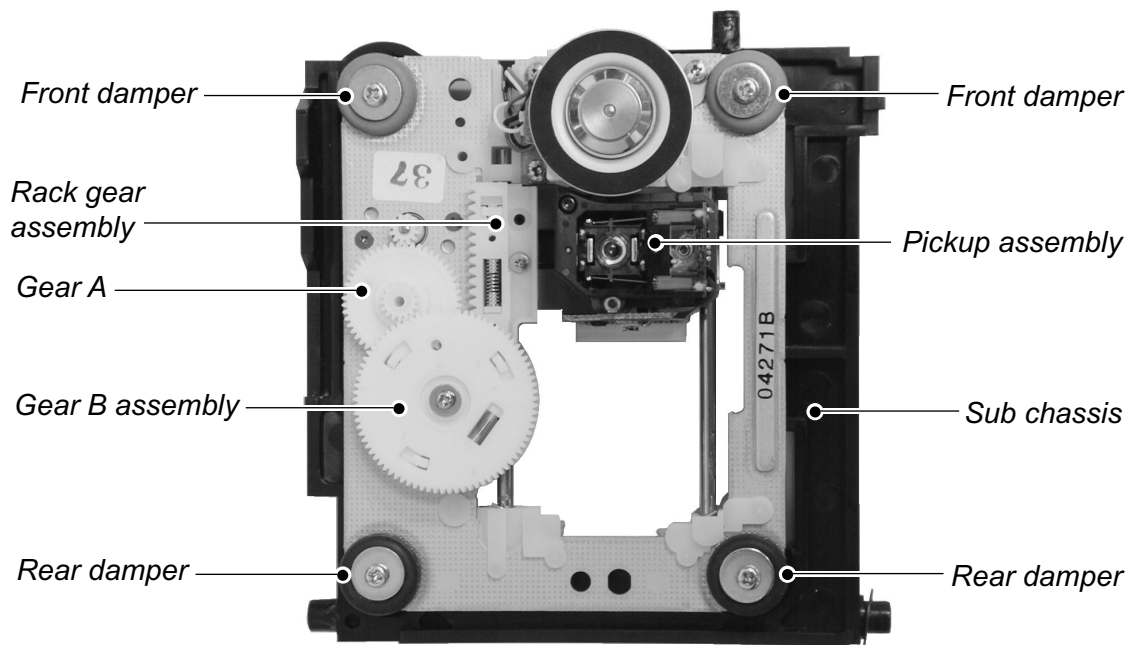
Pickup mechanism chassis assembly (Top side)
